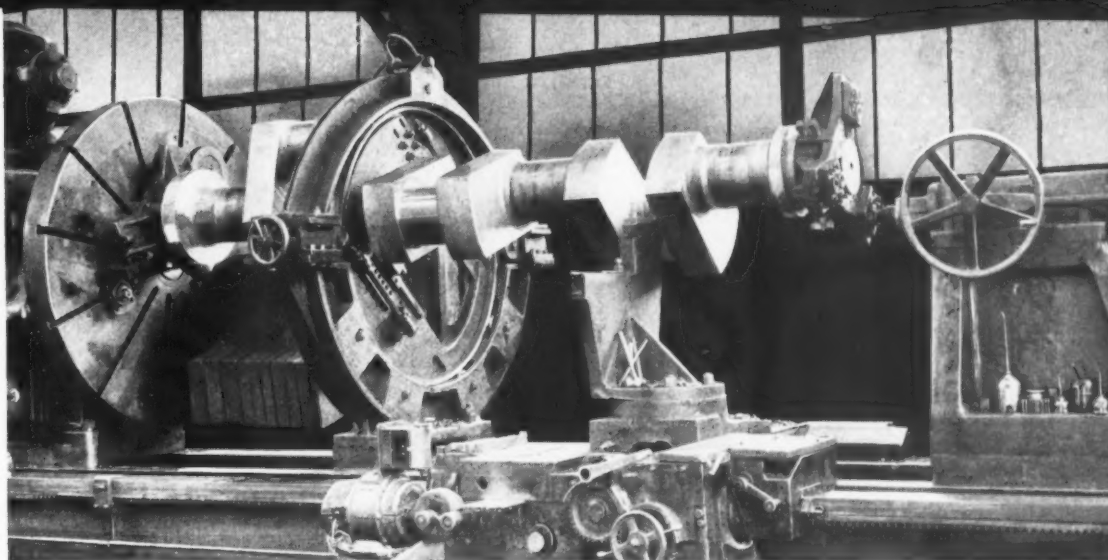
The Main Bearings are Rough-turned as Shown previous to Sawing and Drilling out the Crank Lugs to Form the Crankpins
